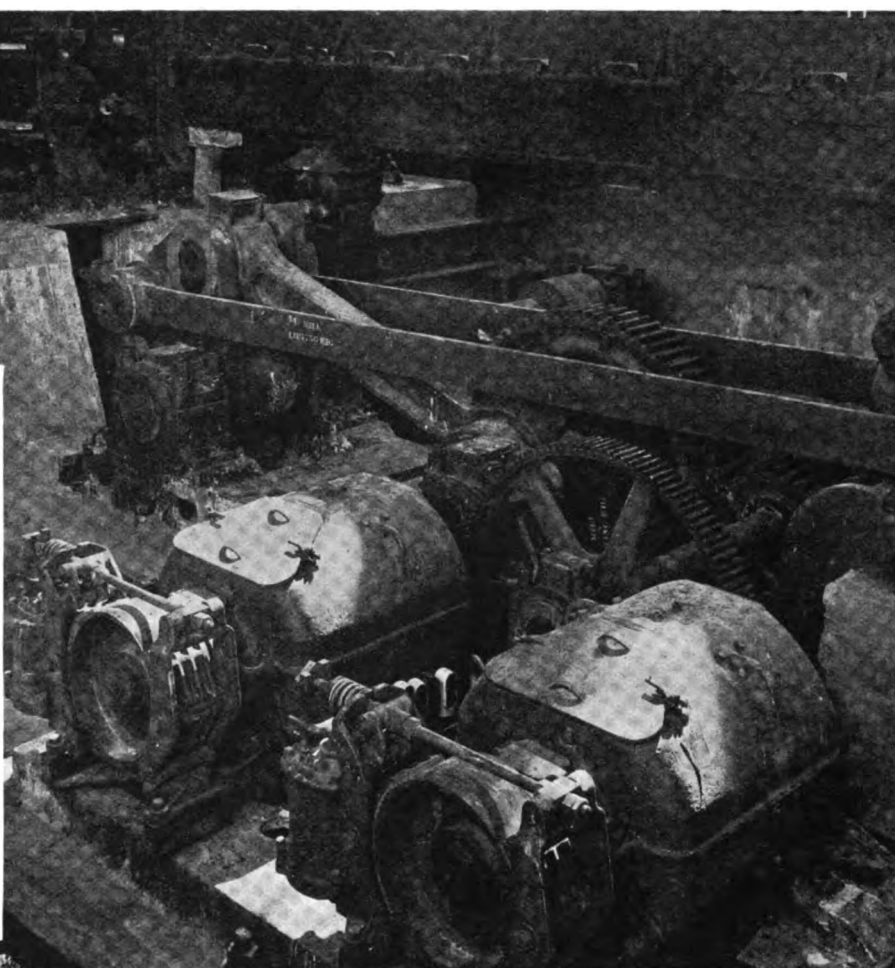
These brakes are on the motors driving the tilting mechanism of a bar mill in a large steel plant.
